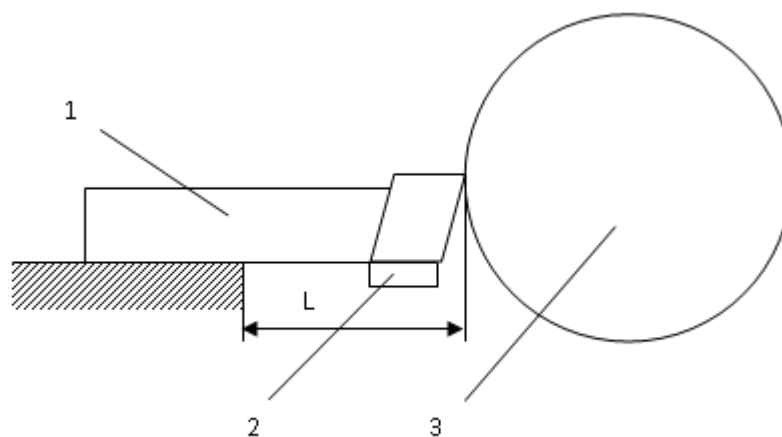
Energy generation element position on a turning tool scheme: 1 - cutting tool; 2 - energy generator; 3 - workpiece
